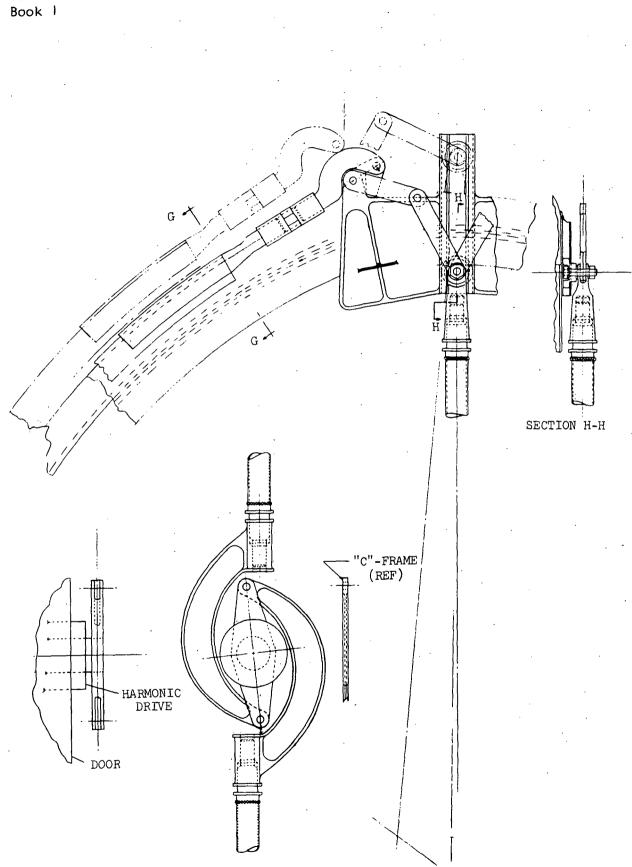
Configuration 3B Airlock Door Latching Seal Clamp
